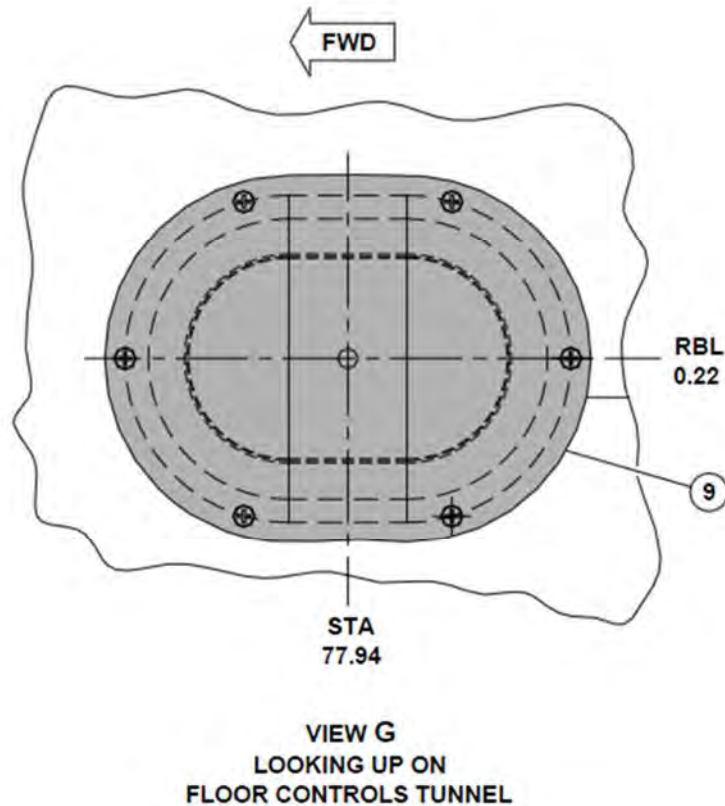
Structural Access Panels (Sheet 2 of 3)
